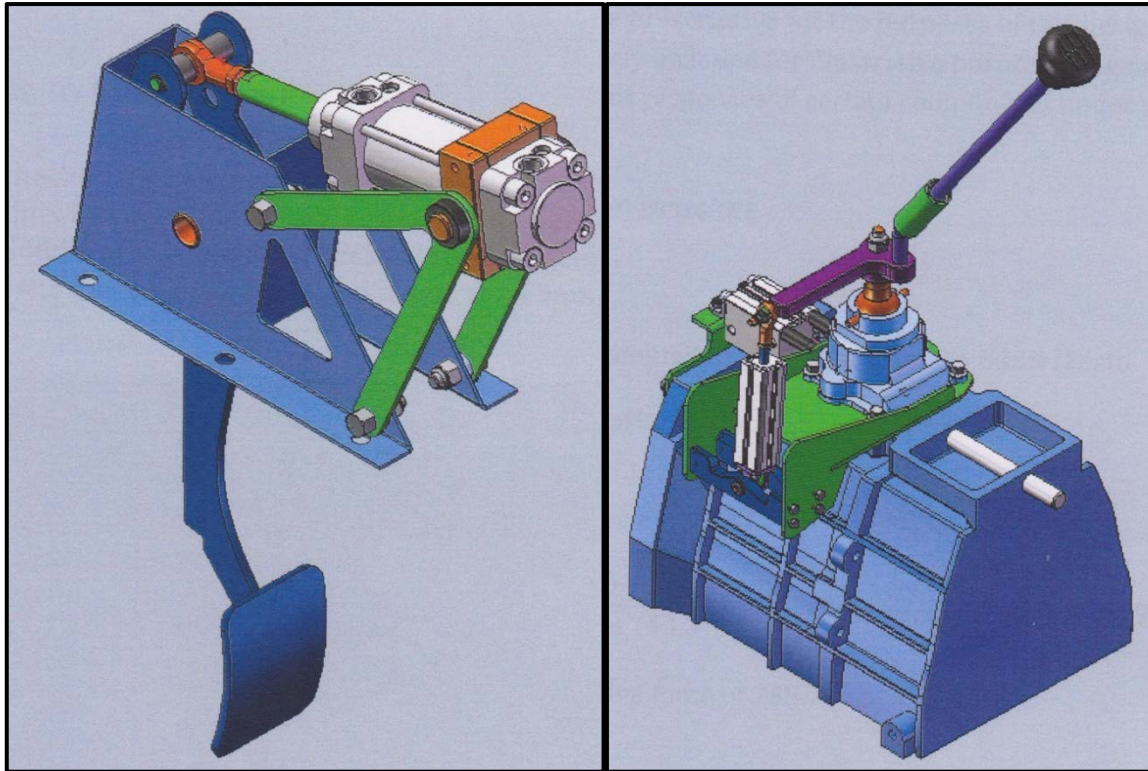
CAD assembly of clutch pedal actuator (left) and gear shift actuators (right) (Barnard 2008a)
